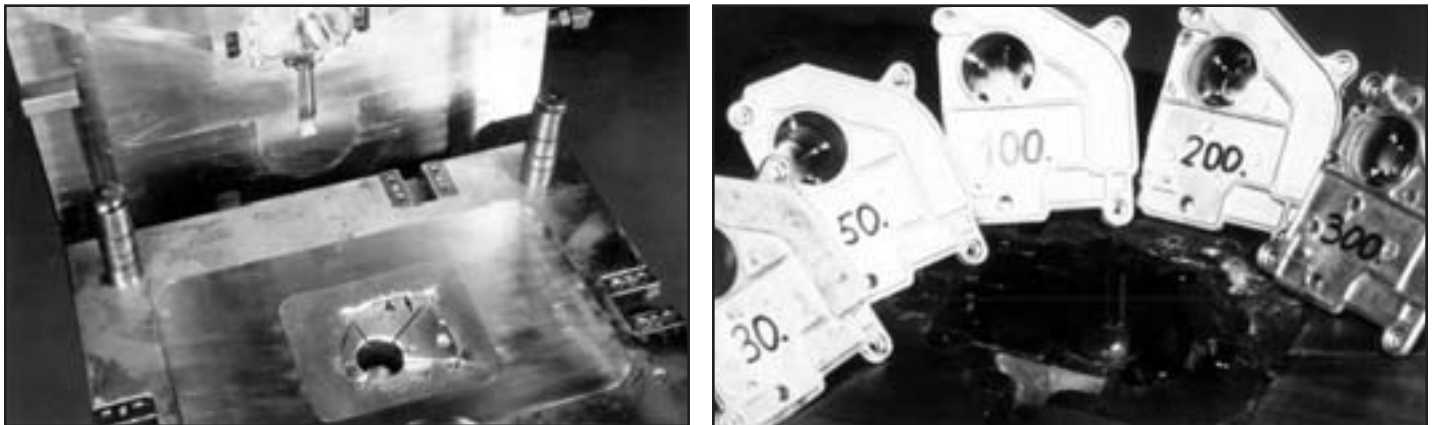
Die made by laser sintering metal powder and the castings produced in it (DTM Corporation).
